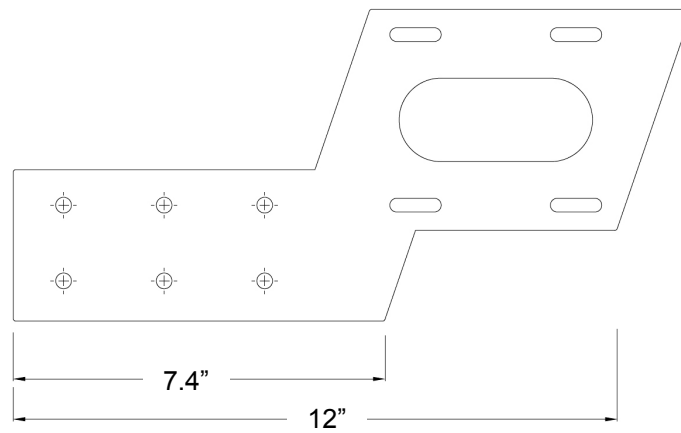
Aluminum Prototype – Motor Mount – Modified (Fall, 2007)
